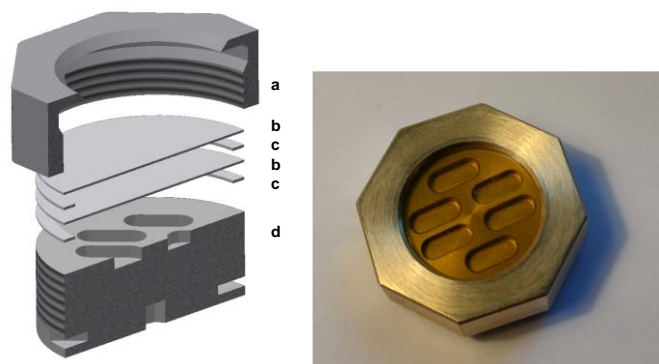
Left image – exploded view CAD drawing of the sample cell assembly – from top to bottom: (a) cap nut, (b) KAPTON disk, (c) TEFLON gasket, (b) KAPTON disk, (c) TEFLON gasket, (d) cell body; right image – top view of a sealed sample cell with six sample cavities (outer diameter ~30 mm) (Schacherl et al., 2022b).
